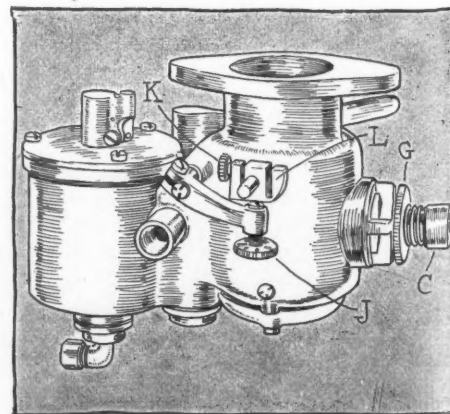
ADJUSTMENT OF RAYFIELD CARBURETER
